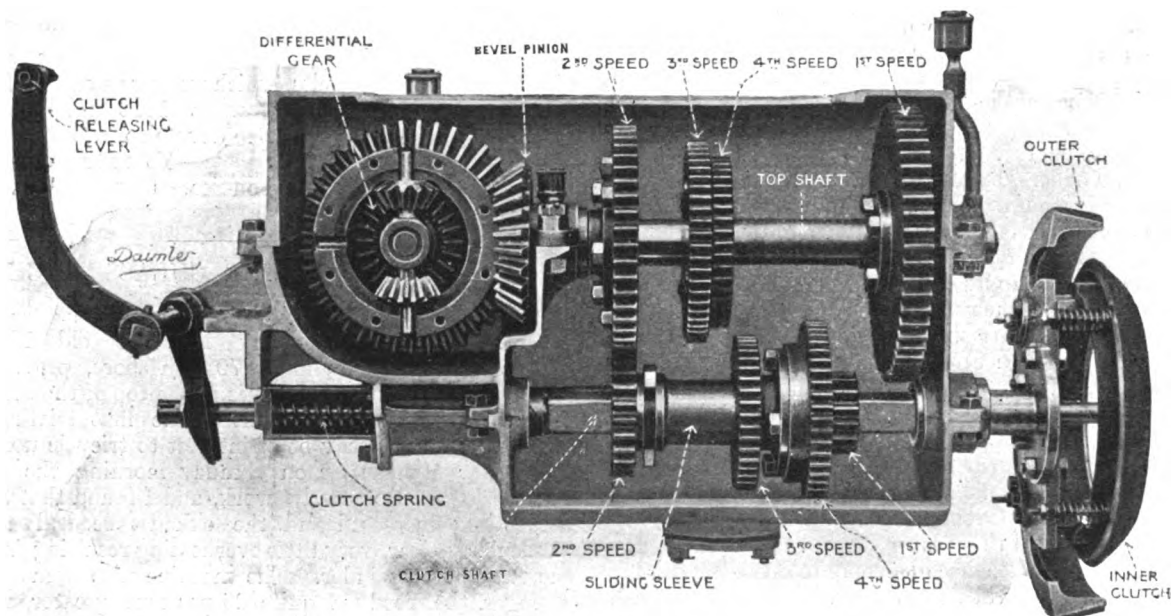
SECTIONAL VIEW OF GEAR-BOX AND CLUTCH ON DAIMLER 6-B.H.P. CAR.
